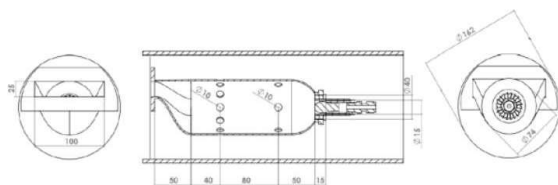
Geometry of the combustor (All dimensions are in mm.)
